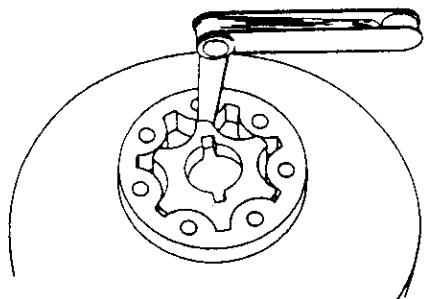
Position pumping element as shown to check tooth clearance. Refer to text.
